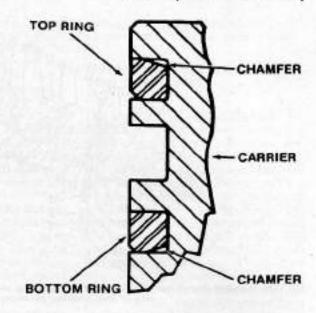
Sealing rings must be installed with inside chamfer up on top ring and inside chamfer down on bottom ring. Ring gaps must be 180 degrees from each other.
